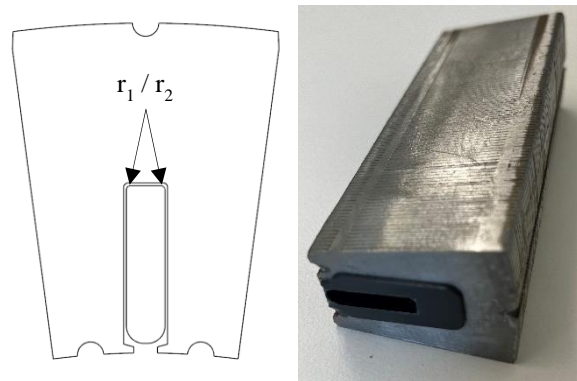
Drawing of a mold core inside of the slot highlighting the varied core radius (left) single slot test specimen with molded insulation layer and molded edge protection (right)
